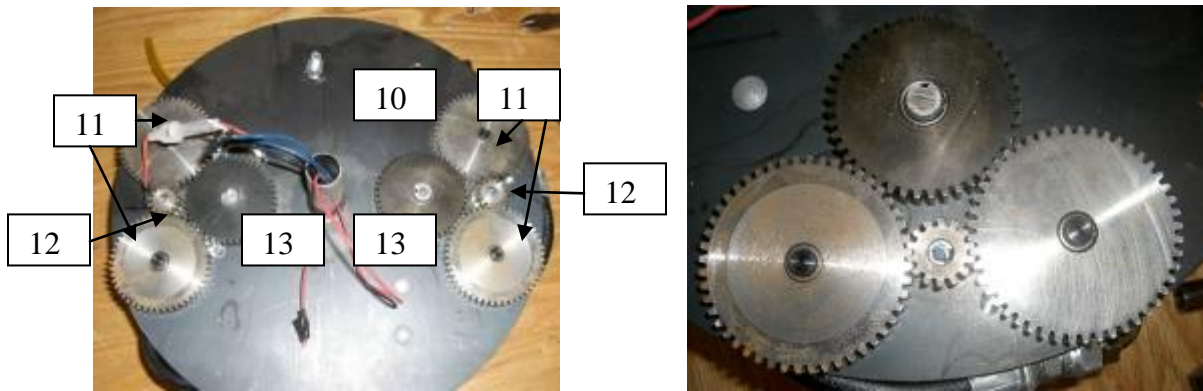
Side view of backside of super bracket assembly and close up of thrust, satellite, and axle gears.
